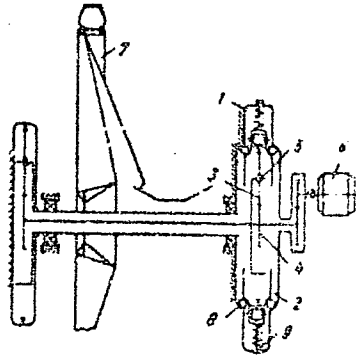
1- immobile casing of the clutch; 2- tothing;
